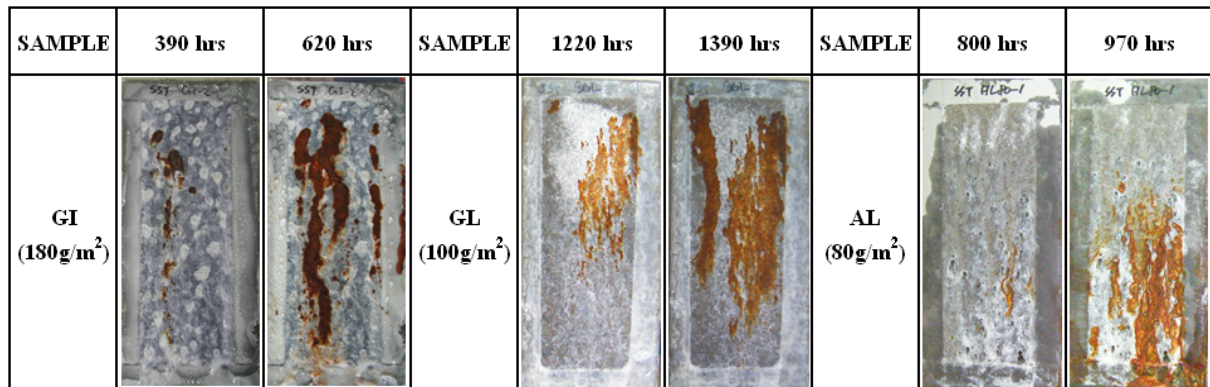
Appearance of coating steel sheets of which cut edges being sealed with SST.
